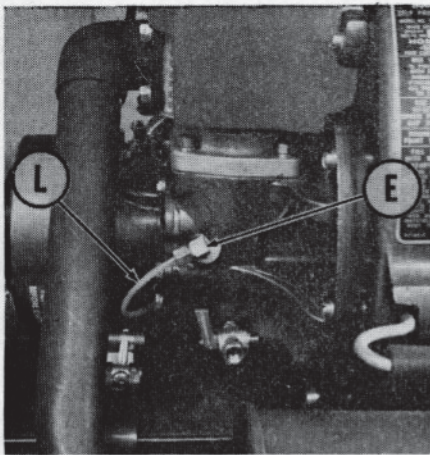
On engine models 8 and 9, governor adjusting screw (see Fig. HL45) is accessible after removing pulse line (L) and elbow (E).
